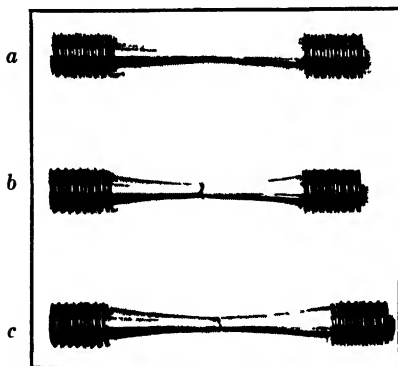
TENSILE FRACTURES OF "DUCTILE" METAL
